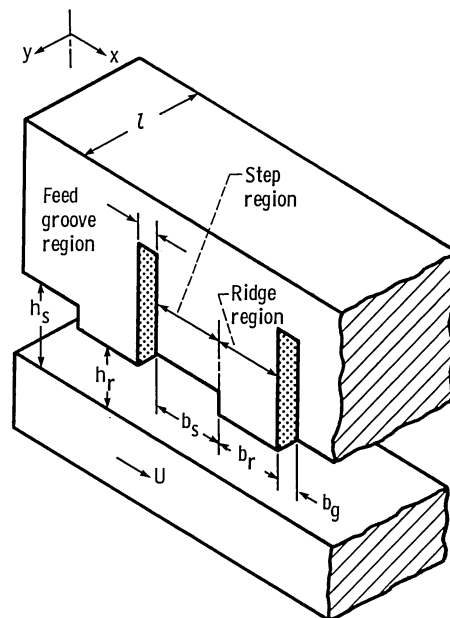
Configuration of rectangular step thrust bearing. (From Hamrock, 1972.)
